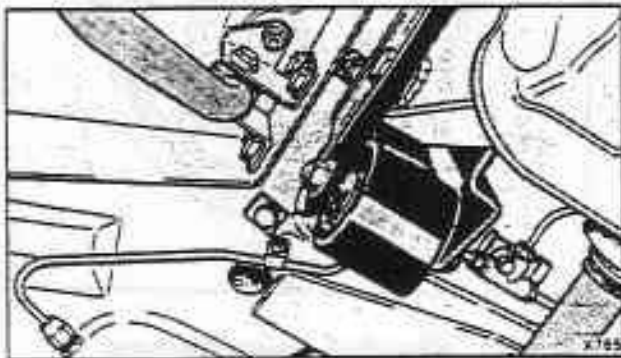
Final drive crossmember mount (left-hand shown)
